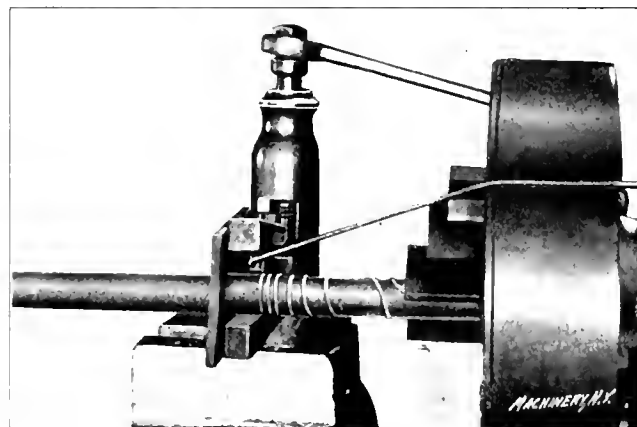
Winding Spring with Lathe running Backward. Note that Wire makes Return Bend around Guide Pin.
